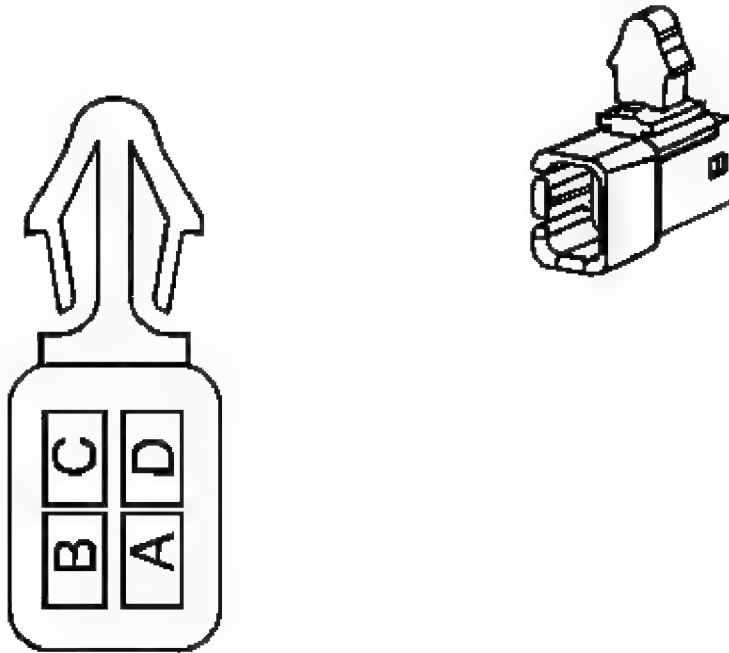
Left Front Heated Seat Cushion Element (KA1) Connector End View
